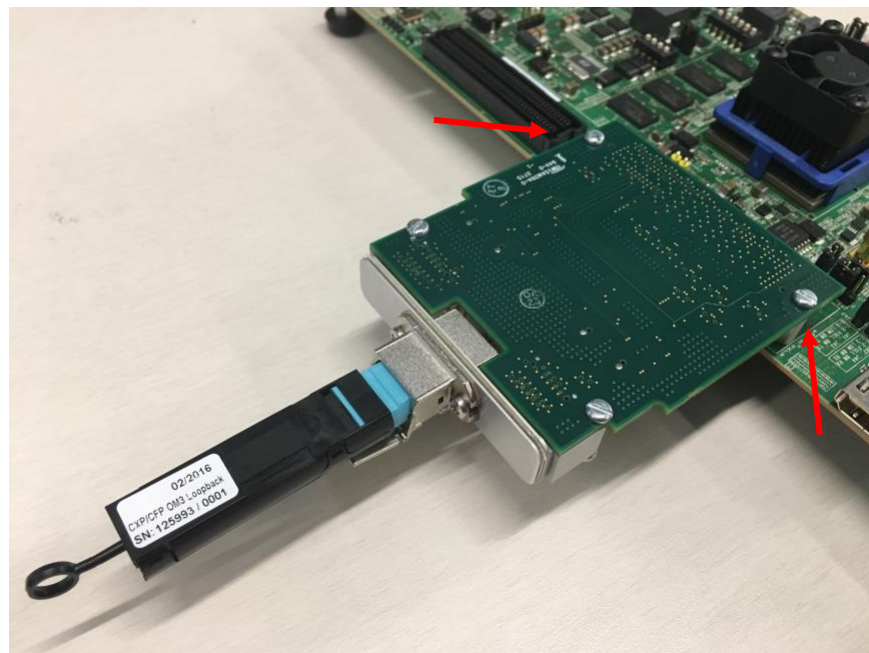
Mate Assembly with SEARAY™ using Standoffs
